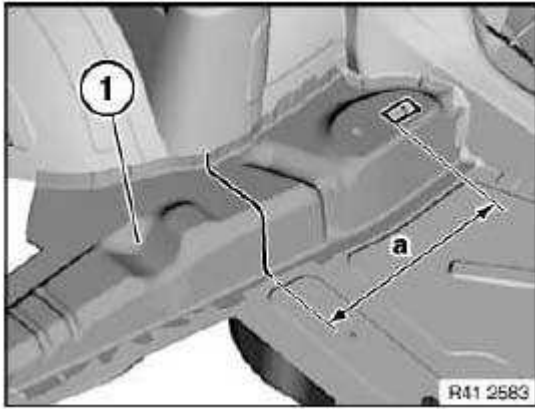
Cut Rear Axle Carrier Upper Section Measurement
